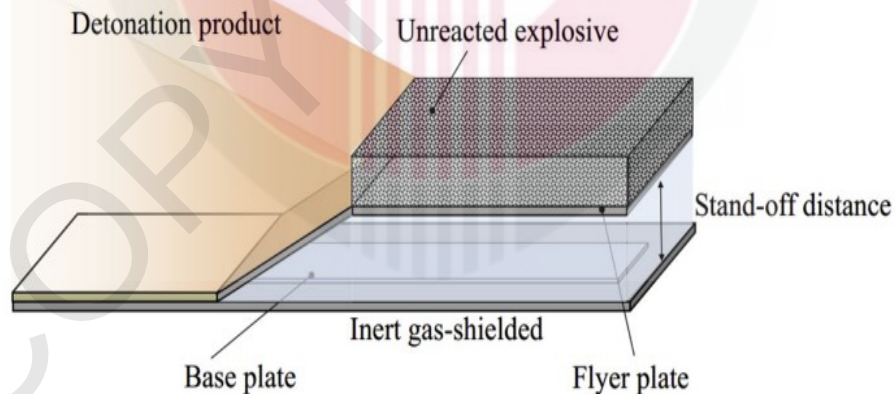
Schematic image of the explosive welding process (Zeng et al, 2019a)
